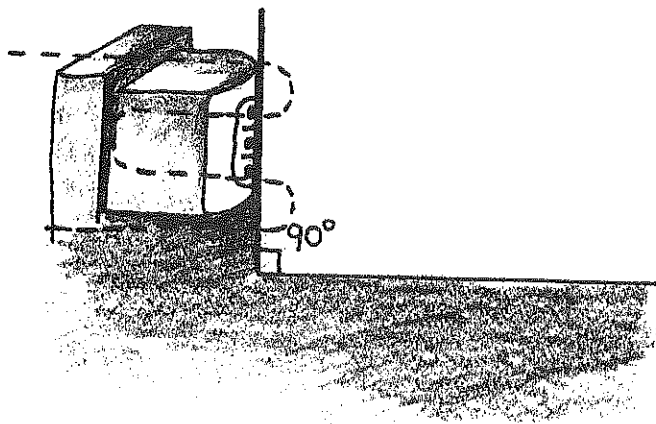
HEAD AND TAPE GUIDE ADJUSTMENTS
